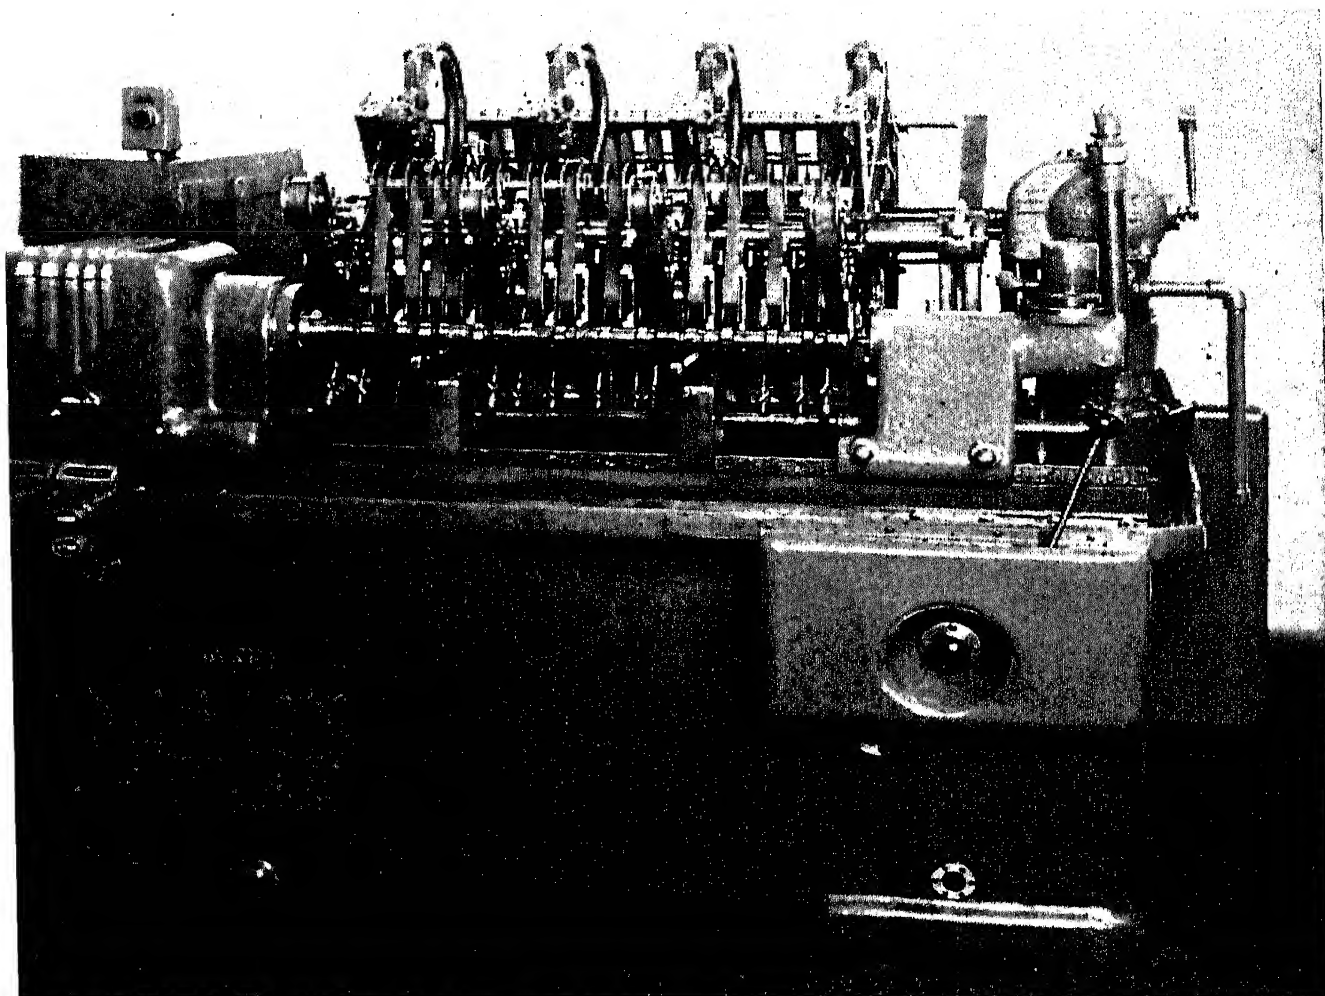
A No. 30 Cam-O Lap abrasive belt lapping machine for camshafts. (Courtesy Norton Co.)
